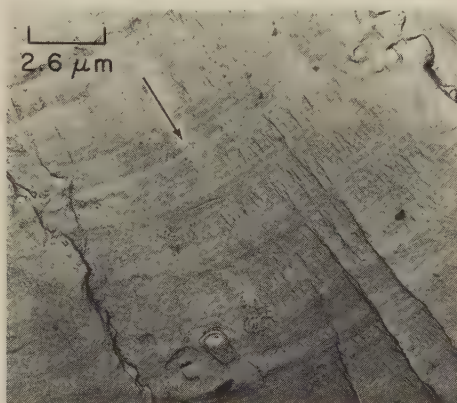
Fatigue striations in a fracture surface of soft aluminum alloy 1100
